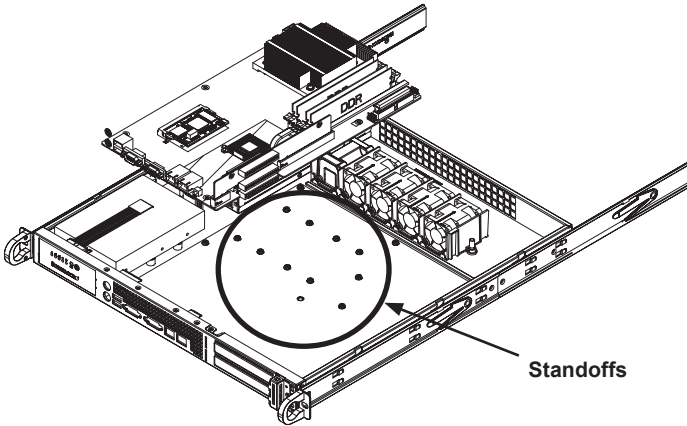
Installing the Motherboard using Chassis Standoffs
